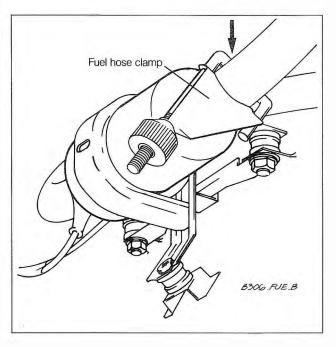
Fuel pump inlet hose being pinched shut (arrow) with special clamp.
